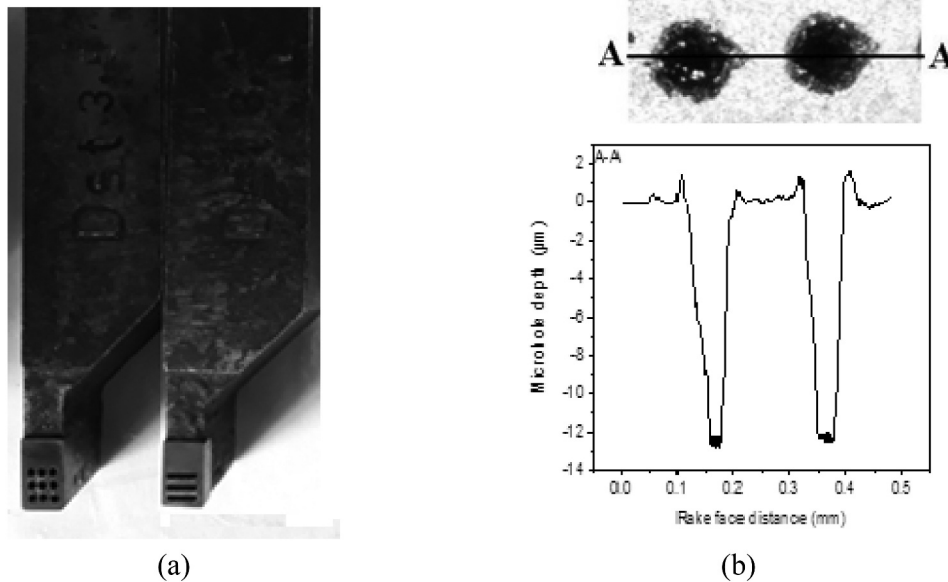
(a) Hole and linear texture designs (b) Depth of the (hole) texture.
